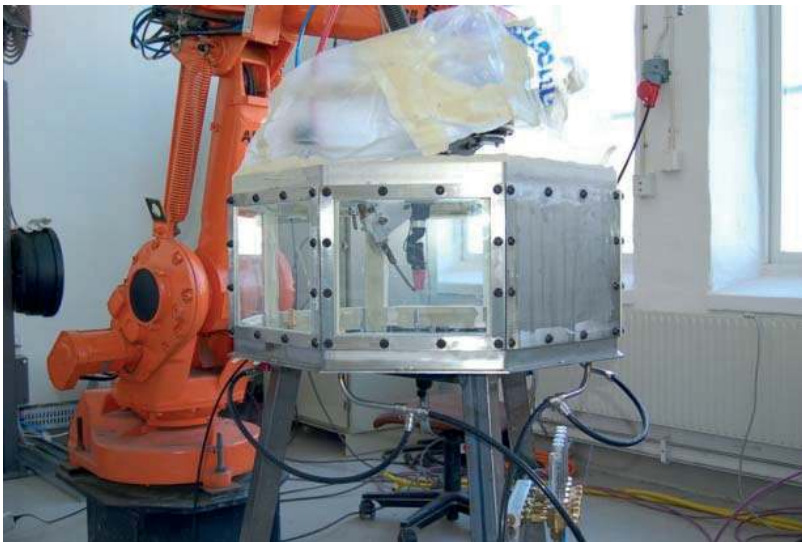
GTAW setup with a robot controlled motion of the heat source, and filler metal. The chamber is filled with an argon gas protective atmosphere.
